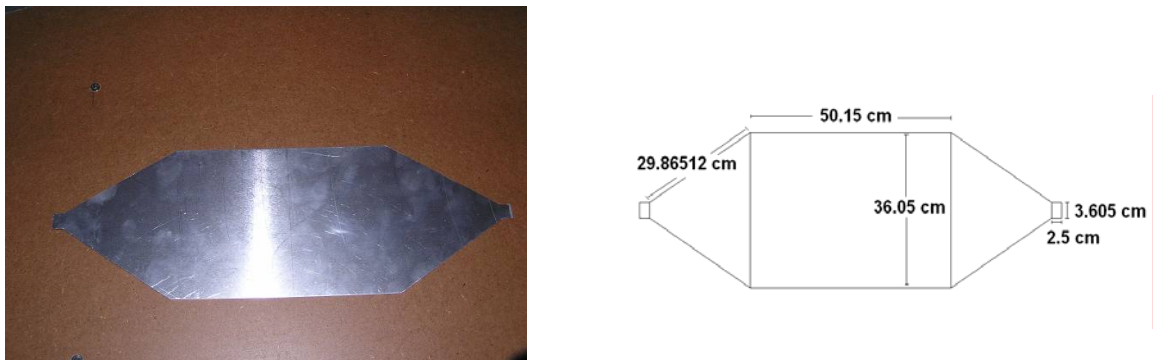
The constructed septum (left); The septum dimensions (right)
